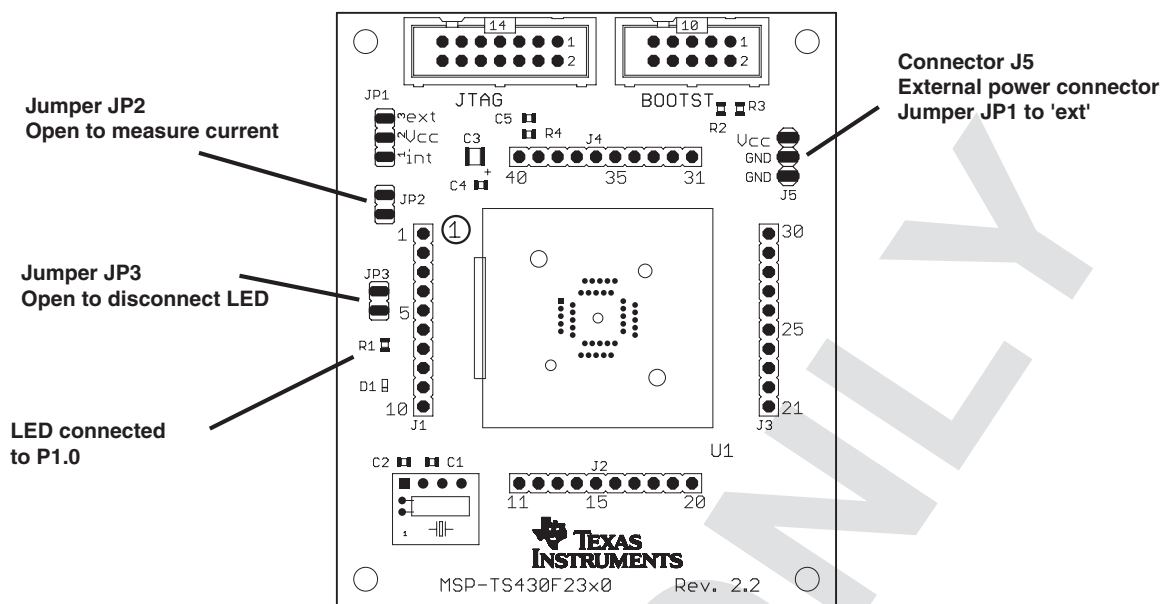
MSP-TS430QFN23x0 Target Socket Module, PCB
